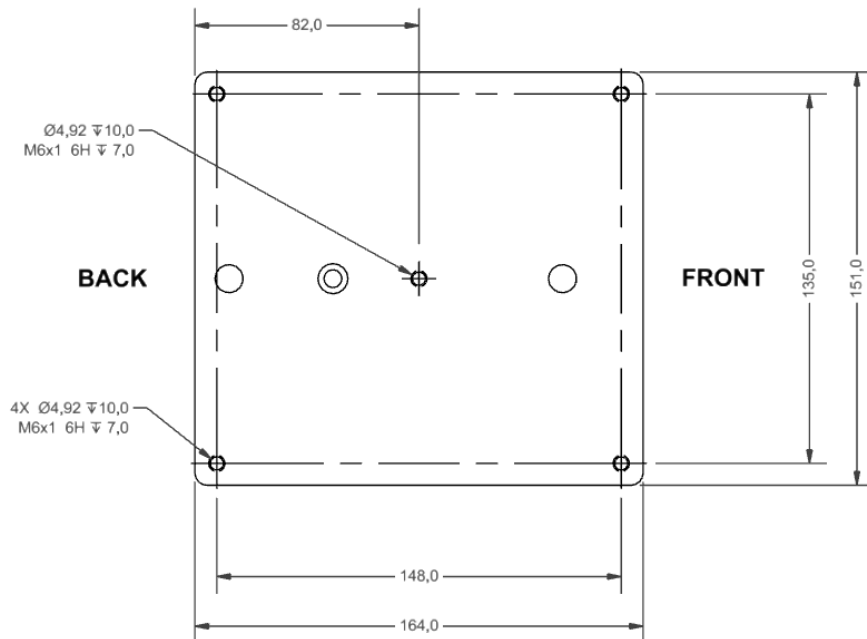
SENSOR HEAD MOUNTING PLATE DIMENSIONS (mm)
